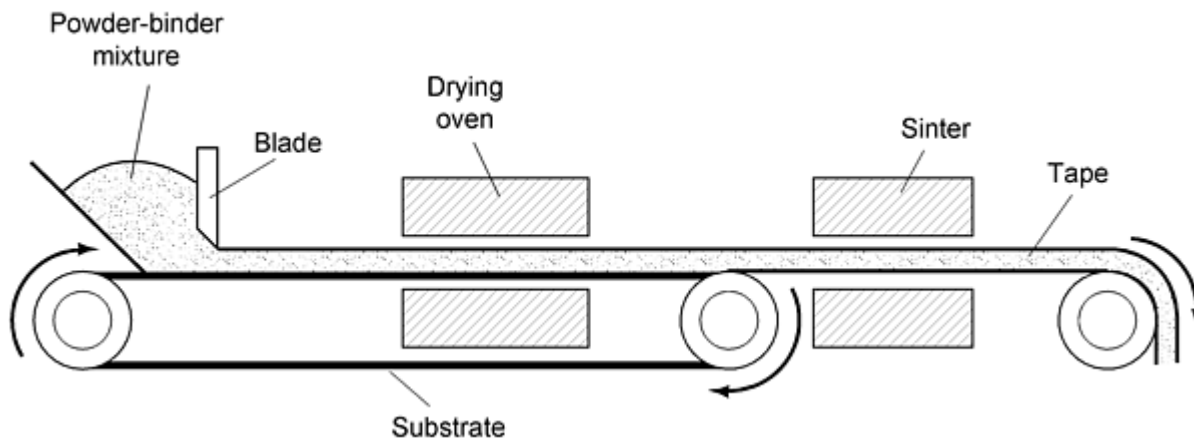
In tape casting, a thin layer of powder-binder mixture is formed on a moving Mylar substrate, which carries the tape into a drying oven prior to sintering. The technique is used to form thin sheets. Source: Ref 1
